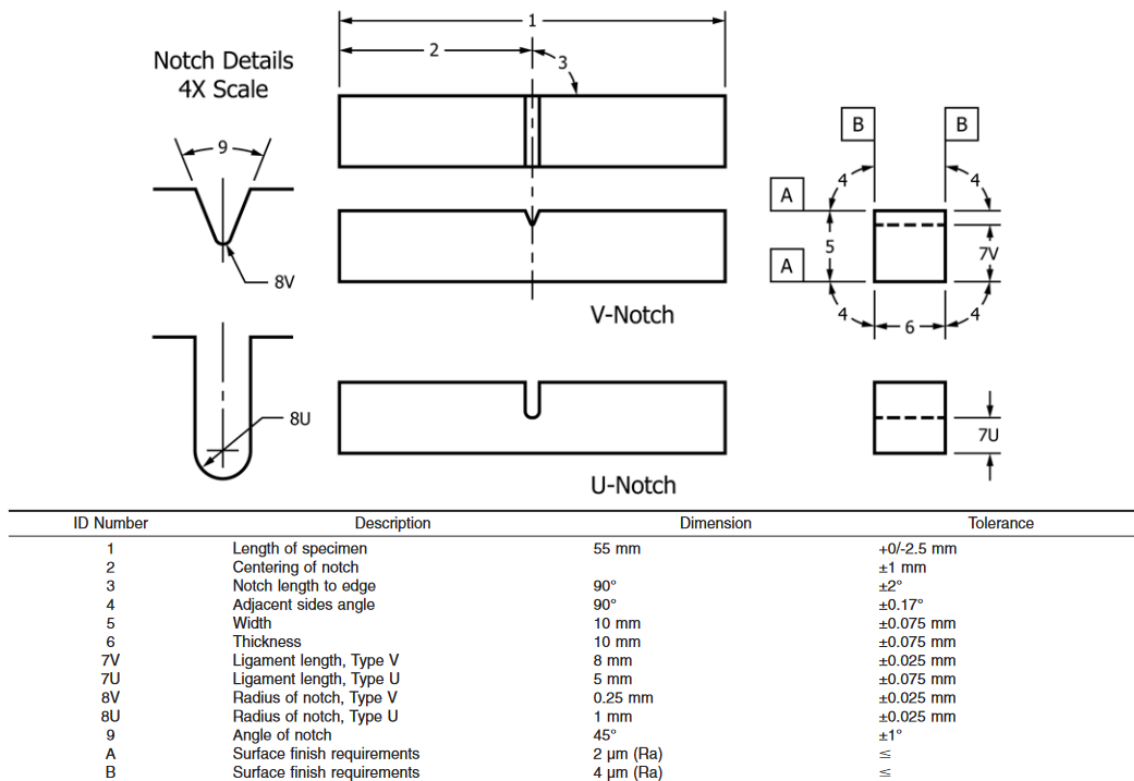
Charpy Test specimen dimension specified in ASTM E23 (2016)
